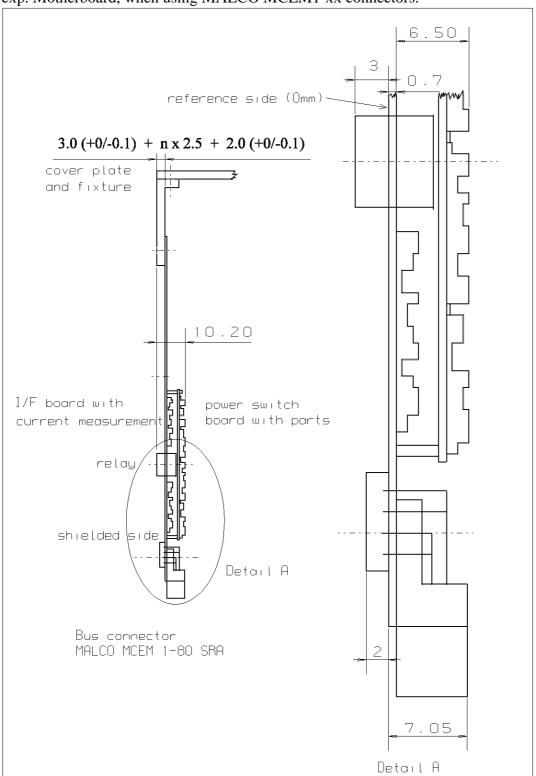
Dimensions of Interface and Soft Switch-on Board (side view)
